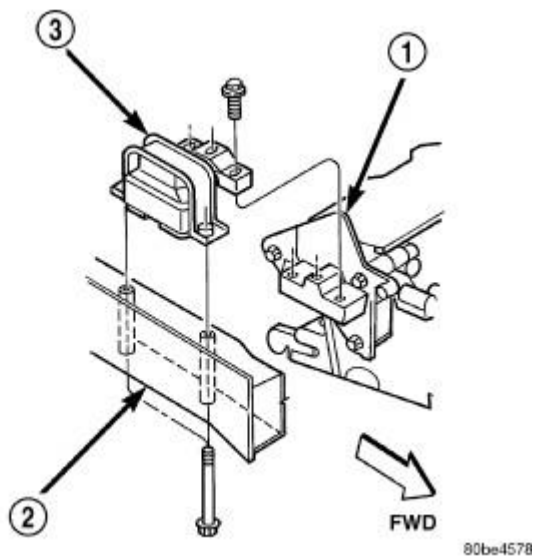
ENGINE MOUNTING RIGHT SIDE
